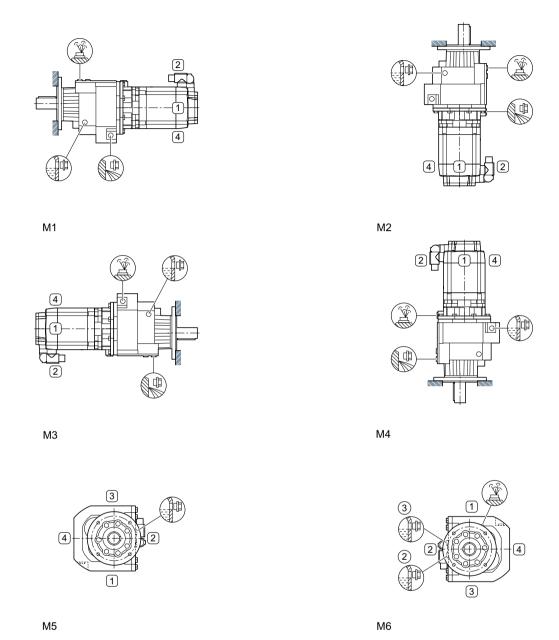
Mounting positions for servo helical geared motors DF and ZF (flange-mounted design) or DZ and ZZ (housing flange design), frame size 39, 2 stage and 3 stage
